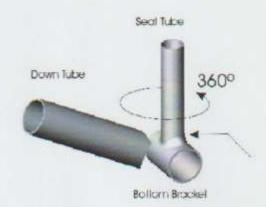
Proper Attachment of Seat Tube to Bottom Bracket
